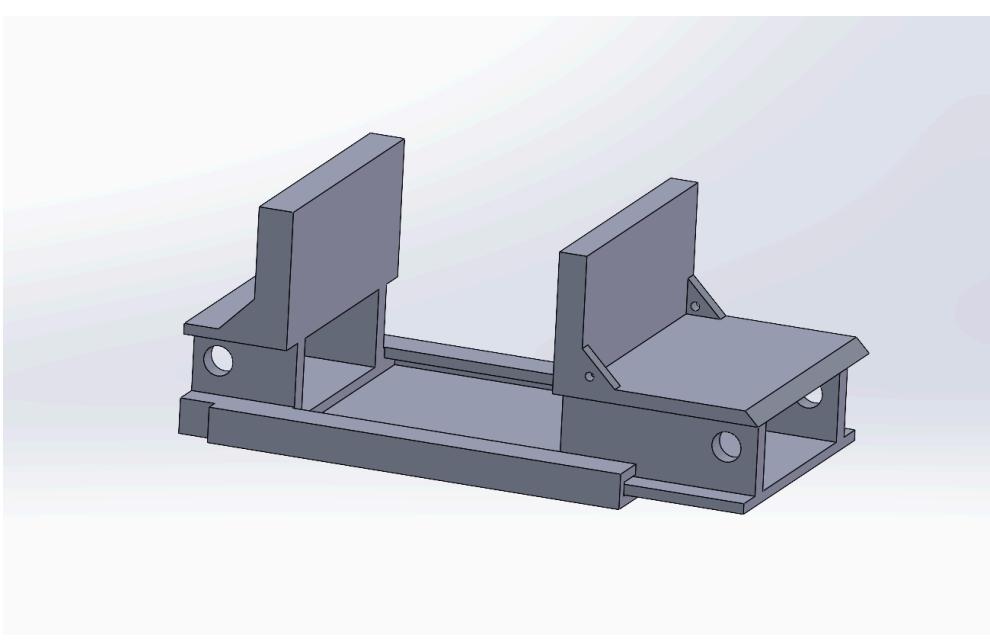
Final CAD models of the sliding block and guide rail mechanism.
